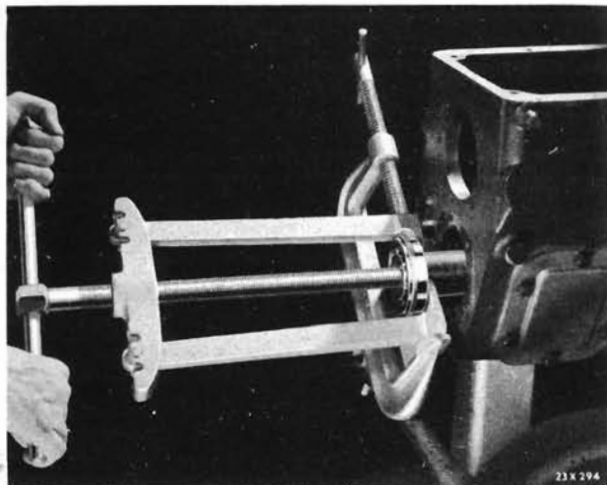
Transmission Synchronizer and Second Speed Gear Assembly
